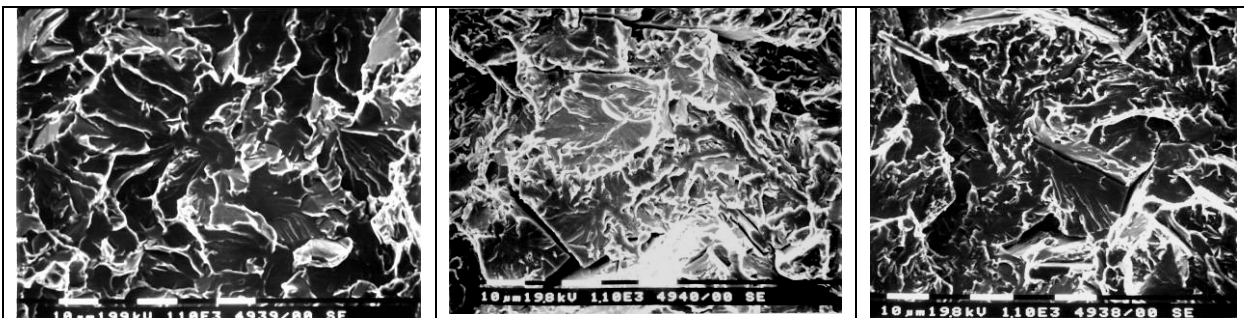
Brittle fracture with cleavage and cracks for WM at -190°C for 9.3 mm/s, 12.3 mm/s and 15.3 mm/s welding speeds.
